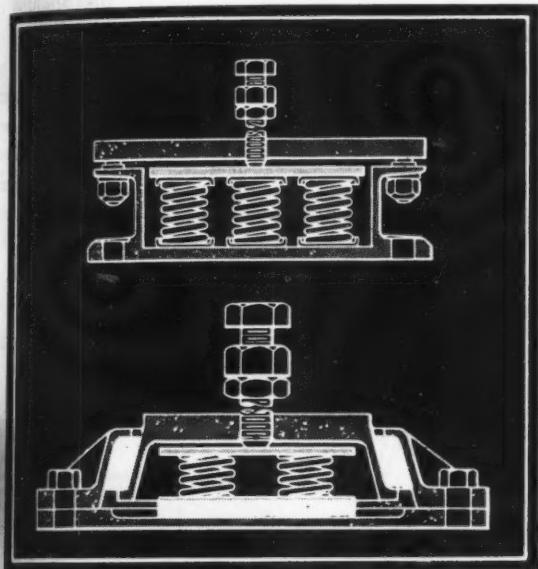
Above—Mountings with and without dampers are two of several designs incorporating steel springs
